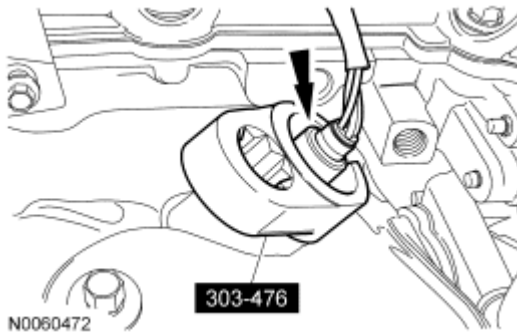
Identifying RH HO2S & Special Tool (303-476)
